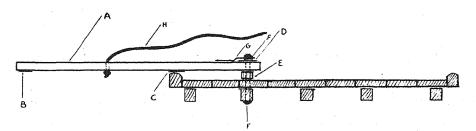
Section of Lorry Deck and Runners with Plank Attached.
